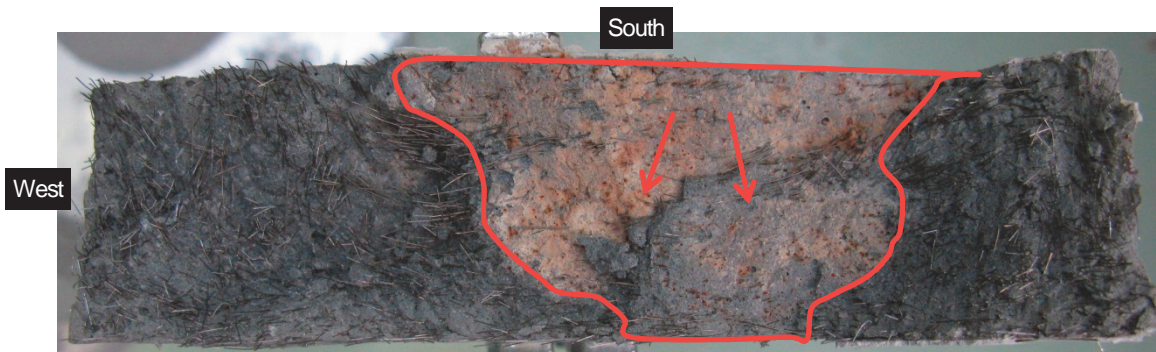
Fatigue fracture surface of S3-3 test specimen (upper half of the fractured specimen)
